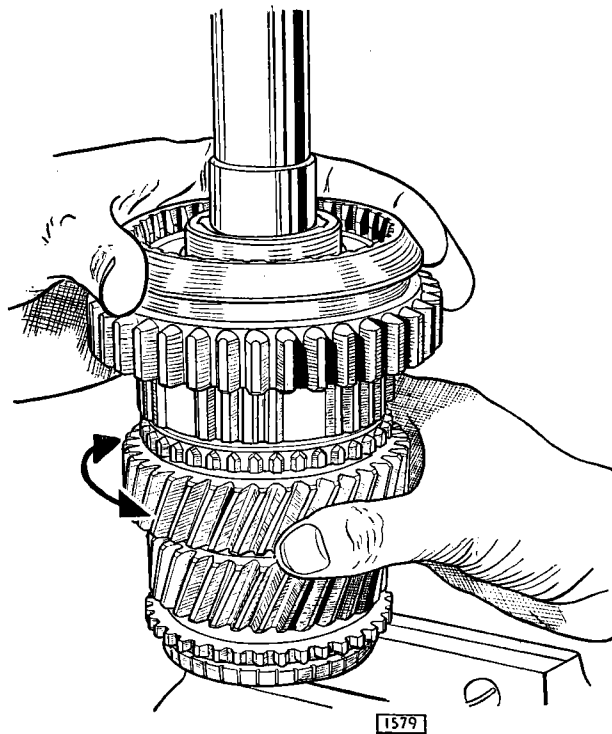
With the 1st gear engaged and slight downward pressure on the synchro-assembly the 2nd gear assembly should be free to rotate
